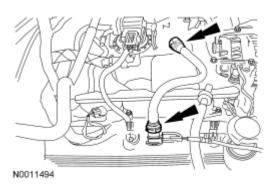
Crankcase Ventilation Tube Courtesy of FORD MOTOR CO.
